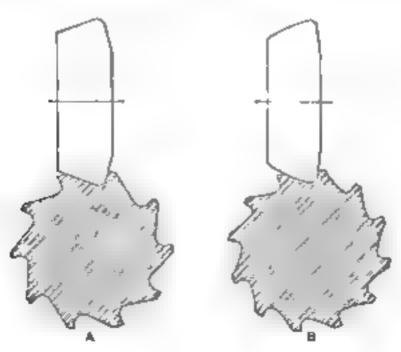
Profile of reamer flutes and double-angle reamer fluting milling cutters.
